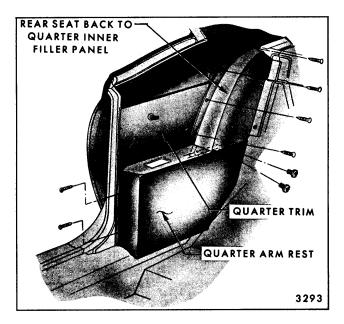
Rear Quarter Trim - "F-37" Styles
